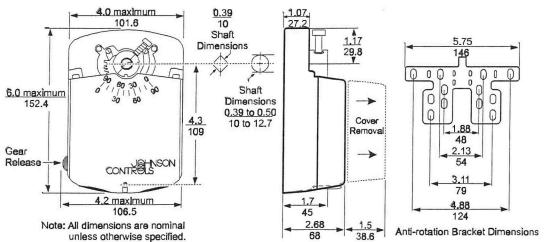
Actuator and Anti-rotation Bracket Dimensions, in. (mm)
